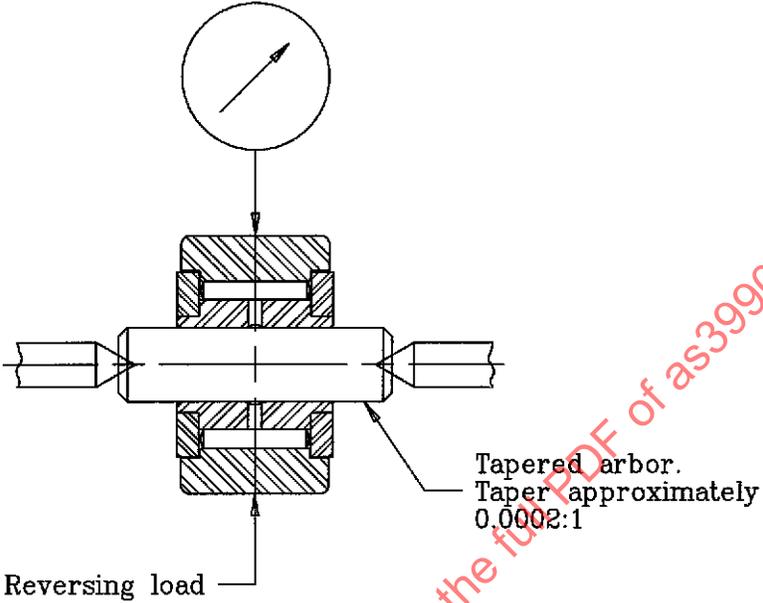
C - Radial Internal Clearance and Radial Runout Test for Type V, VI, and X Bearings
